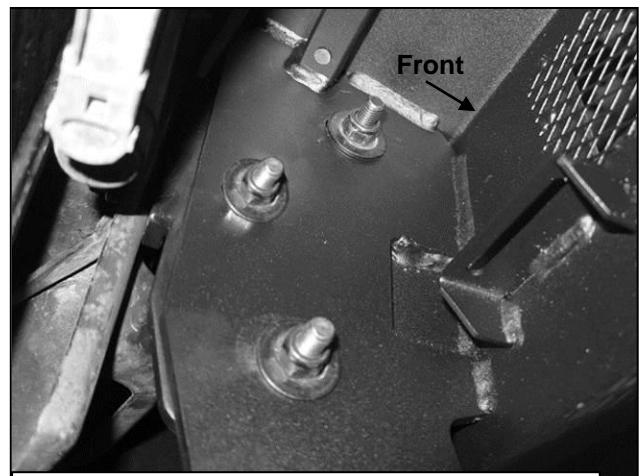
Insert sensor into the sensor mount on back of Bumper, followed by the Retaining Cap with Spacer
